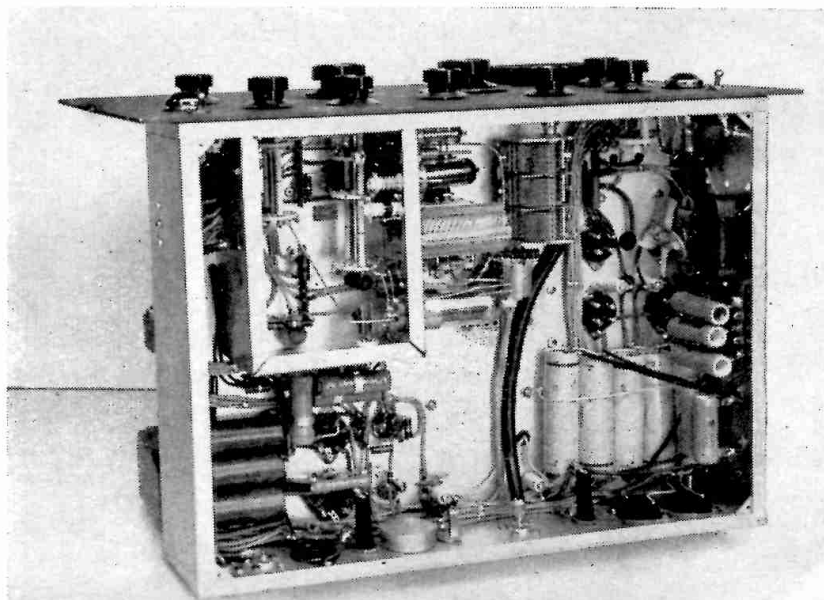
The exciter is assembled using a standard aluminum box as the foundation. The perforated cover has been removed. The bottom of the chassis should also have a perforated metal cover.
